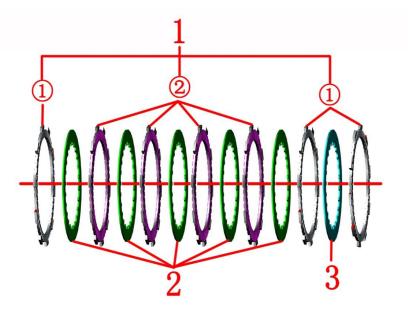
R	IGHT	Clutch assembly-1	Clutch assembly 1 CHK
